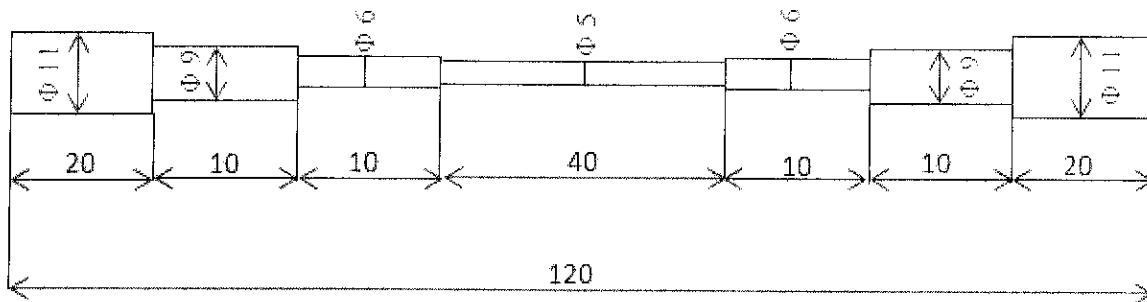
Circular tensile test piece standard 2 step grip with all dimensions in mm.
